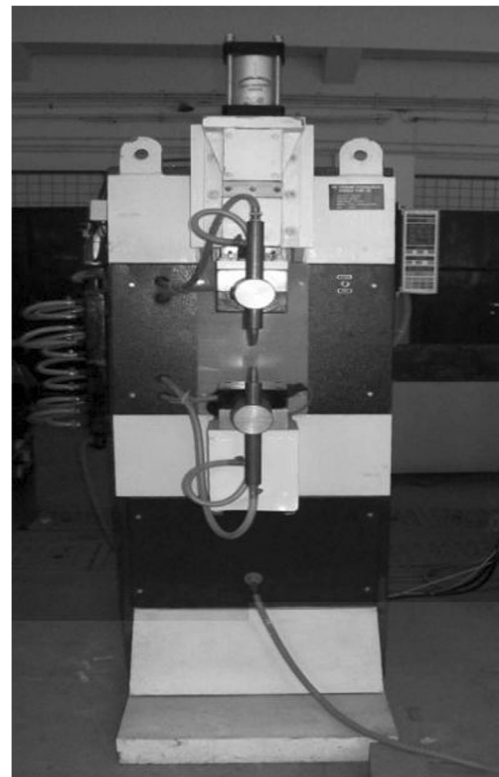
Welding controller AK-54 spot welding machine
